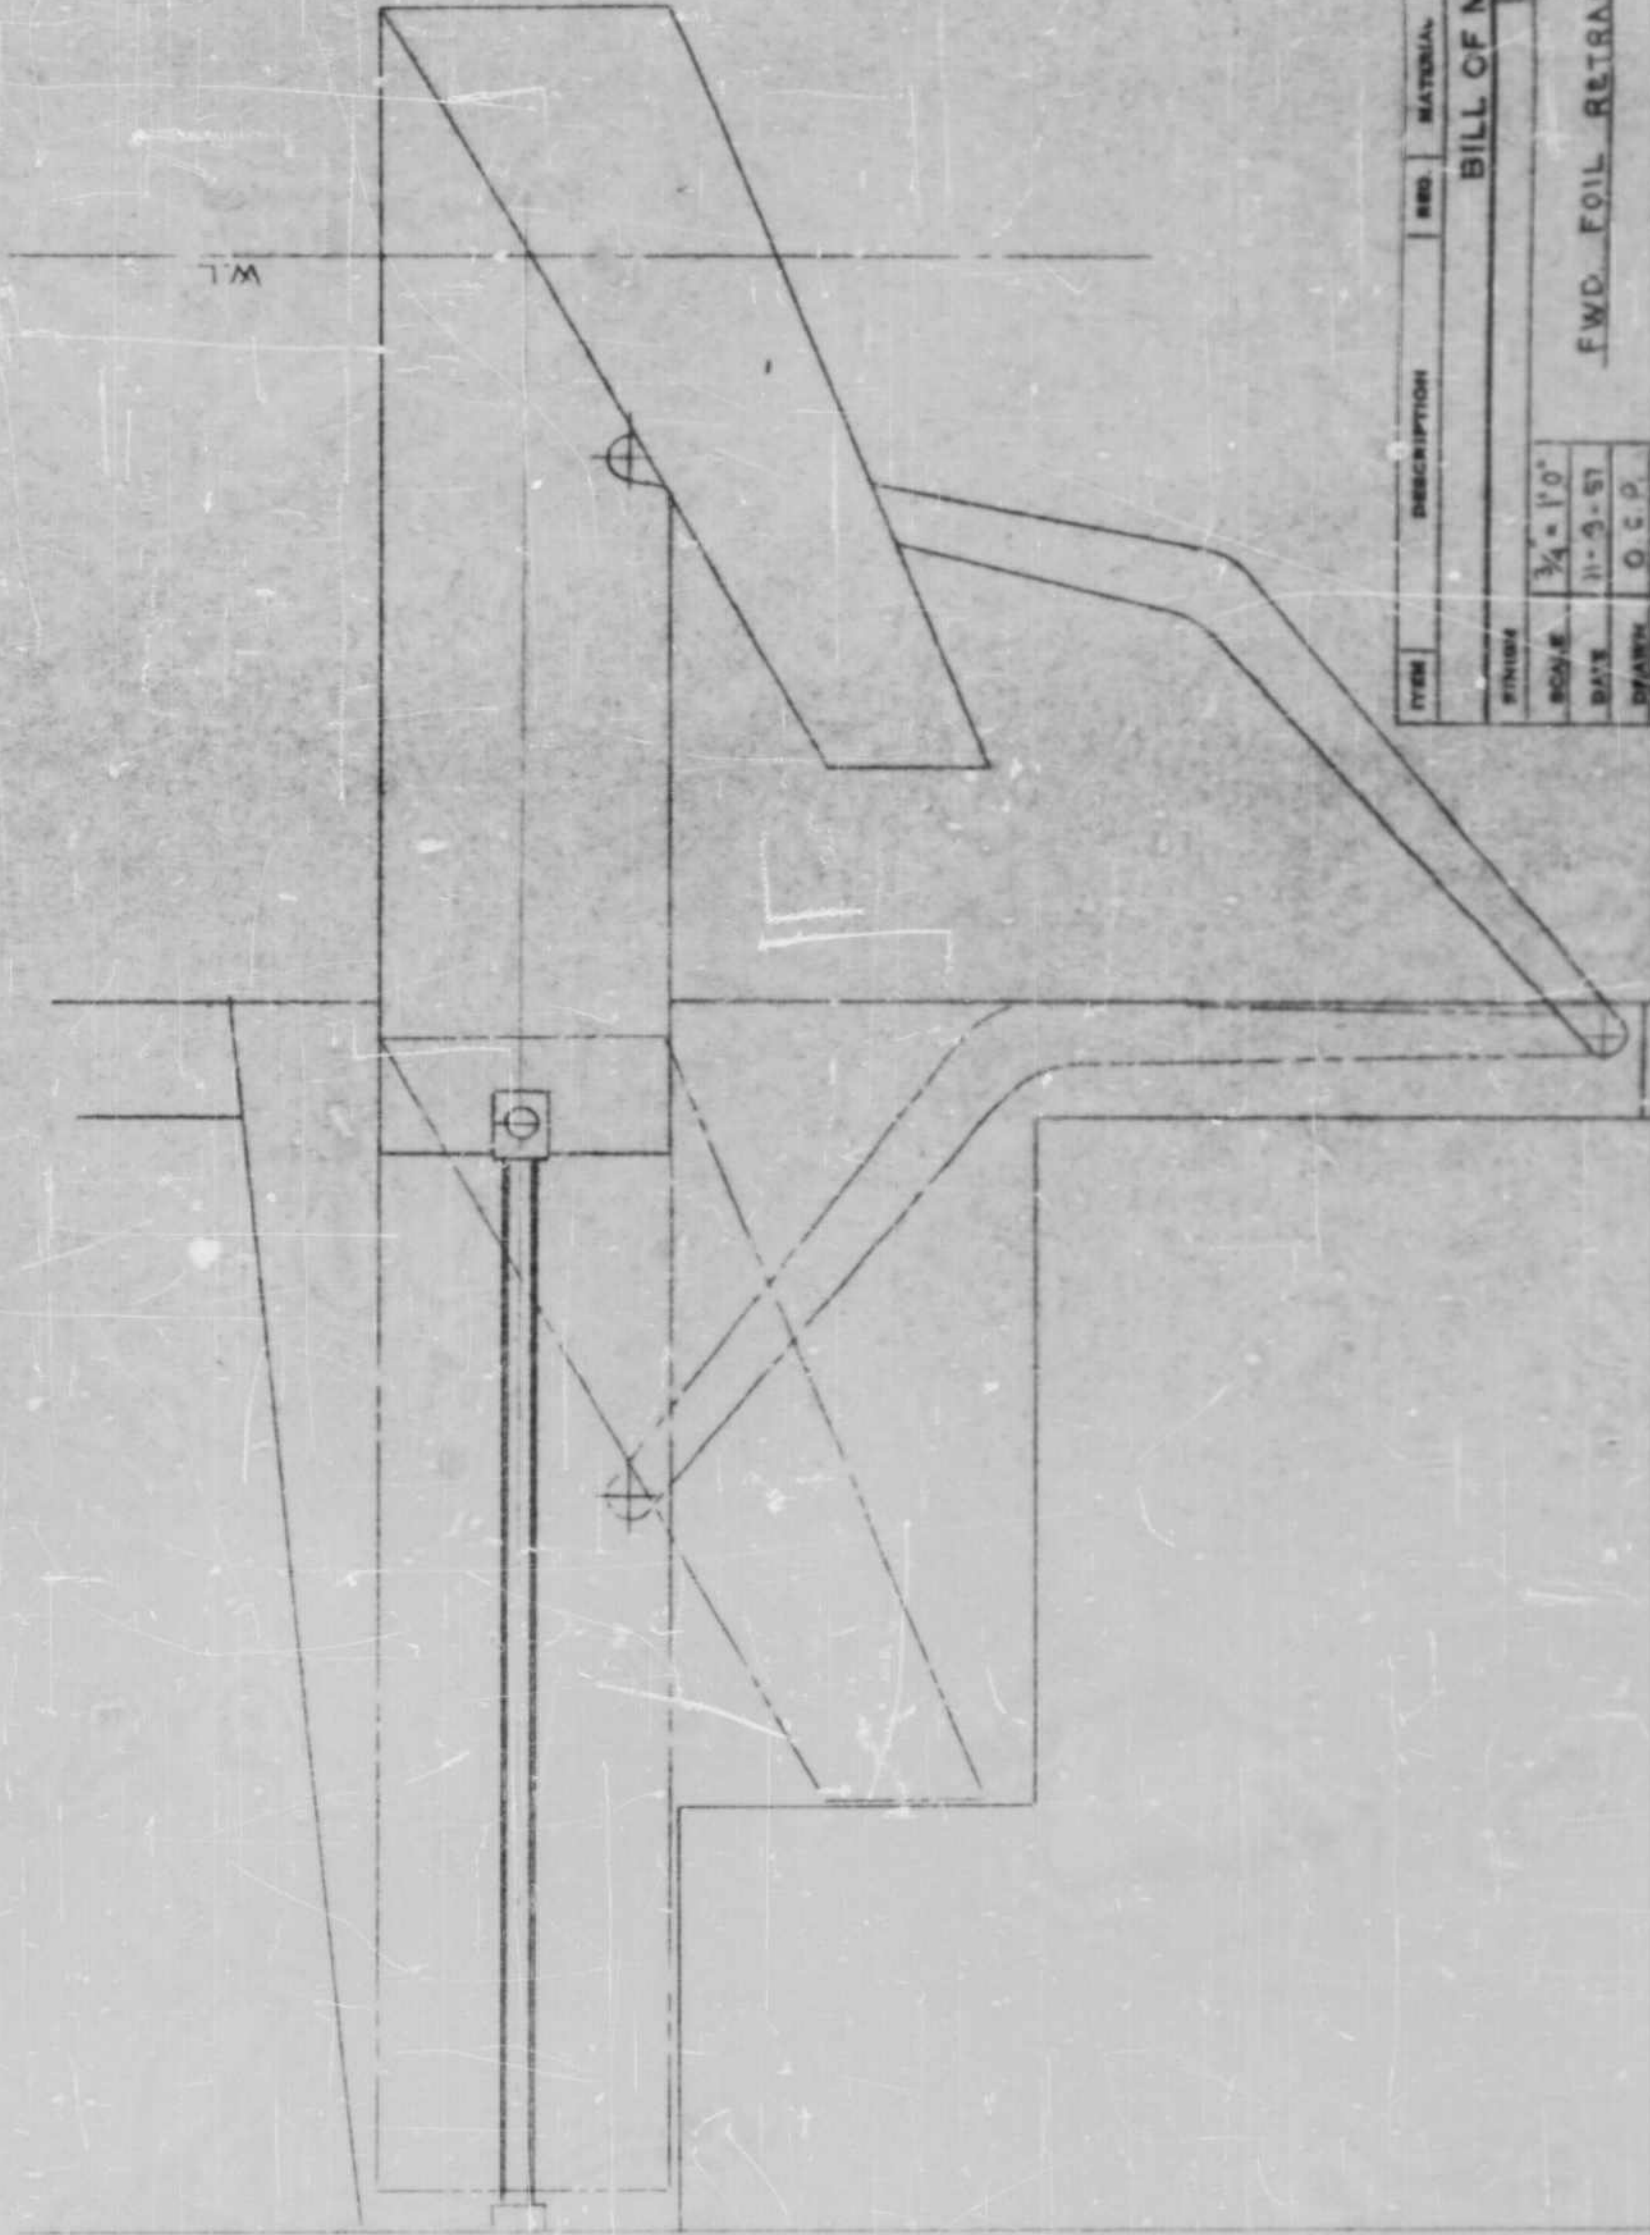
is similar to Figure 24 except that the link is telescoping. Hydraulic means lock the link in extended position in flight.
